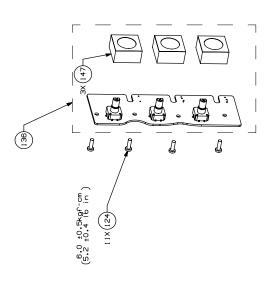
S1 PRO+ IO Panel Assy Exploded View
